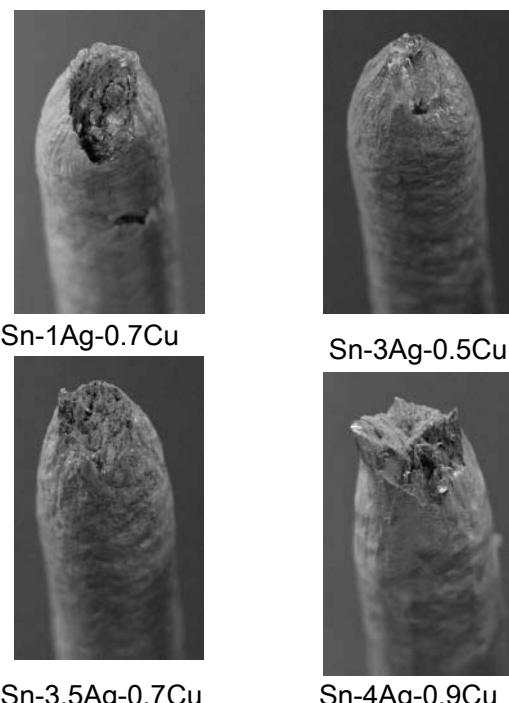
Macroscopic fracture observation of lead-free solder after high-strain-rate tensile test (specimen diameter: 10mm, strain rate: $1.6 \times 10^1 \text{ s}^{-1}$).
